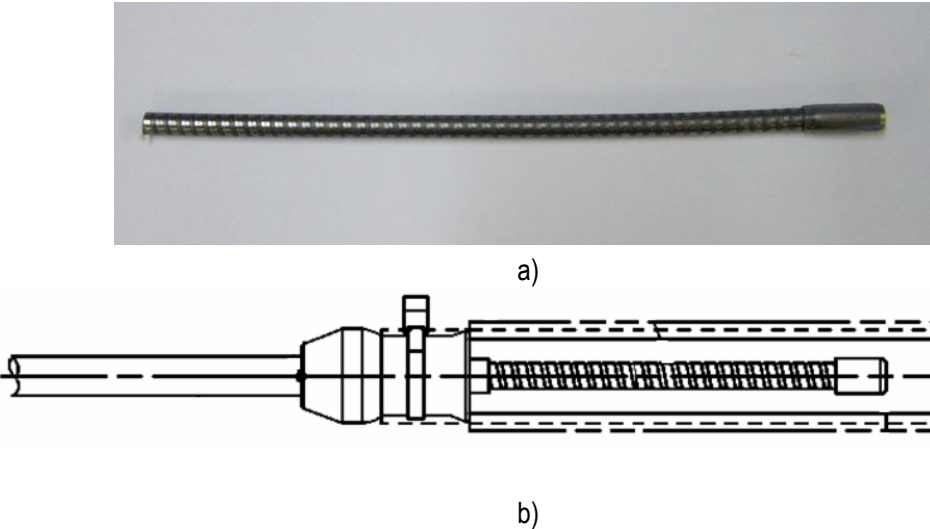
Photograph of a) spiral wound steel tuner and baffle b) spiral wound steel tuner located inside hose bore
